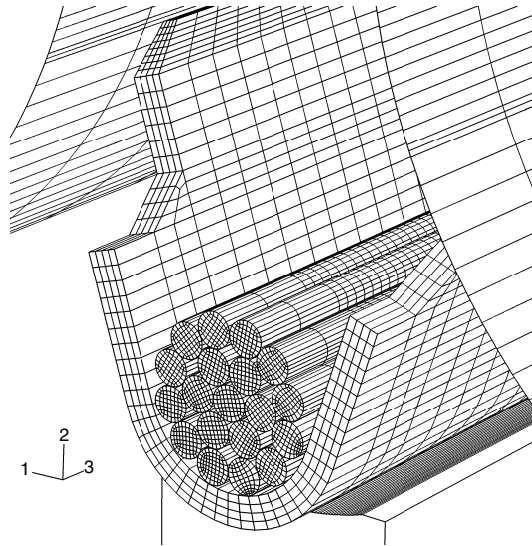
Close-up view of the wire-grip assembly.
